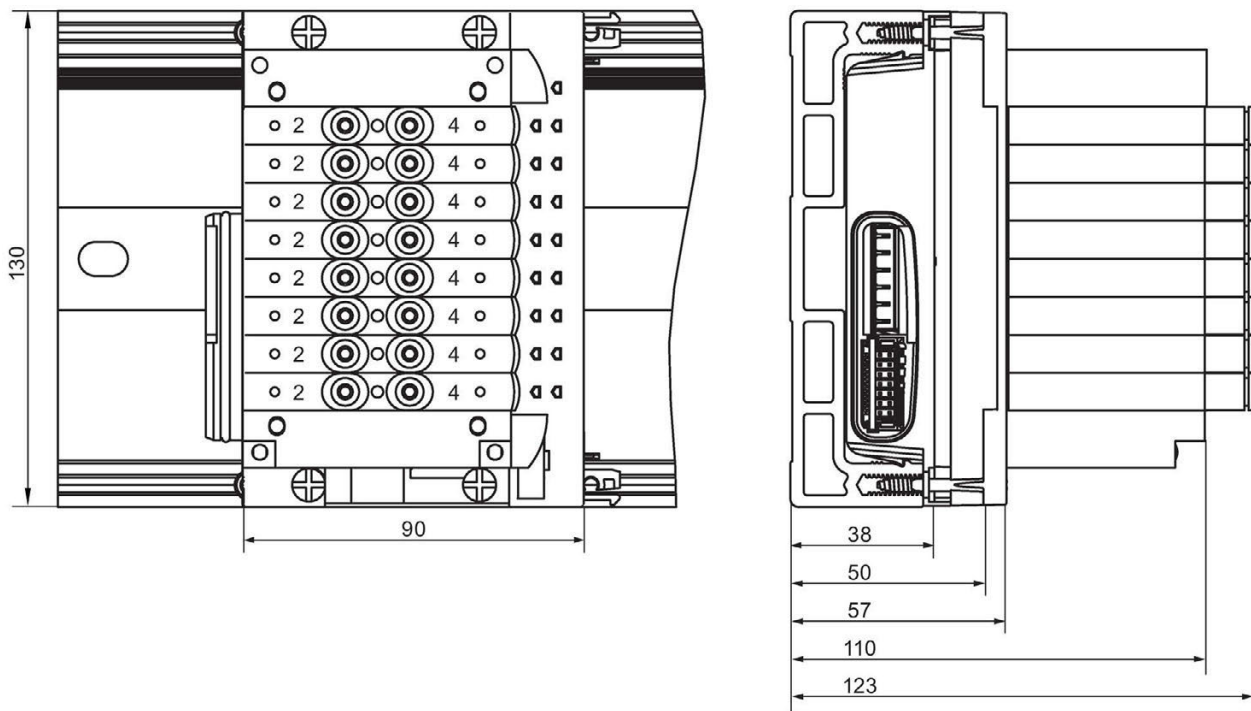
Dimension drawing of 16 DO DC 24V CPV10 pneumatic interface module with FESTO valve terminal CPV10 on compact type rack
